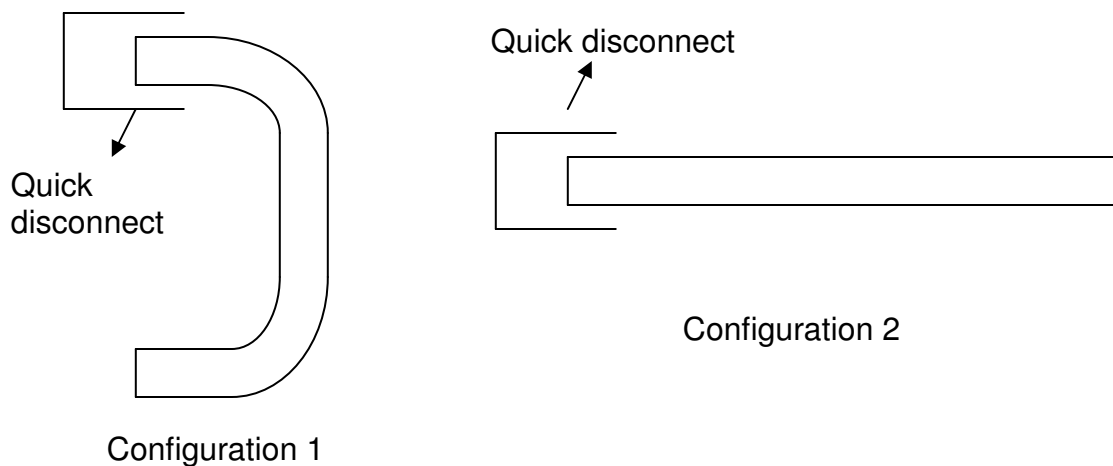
Tube configurations for testing clean and dirty tubes.
